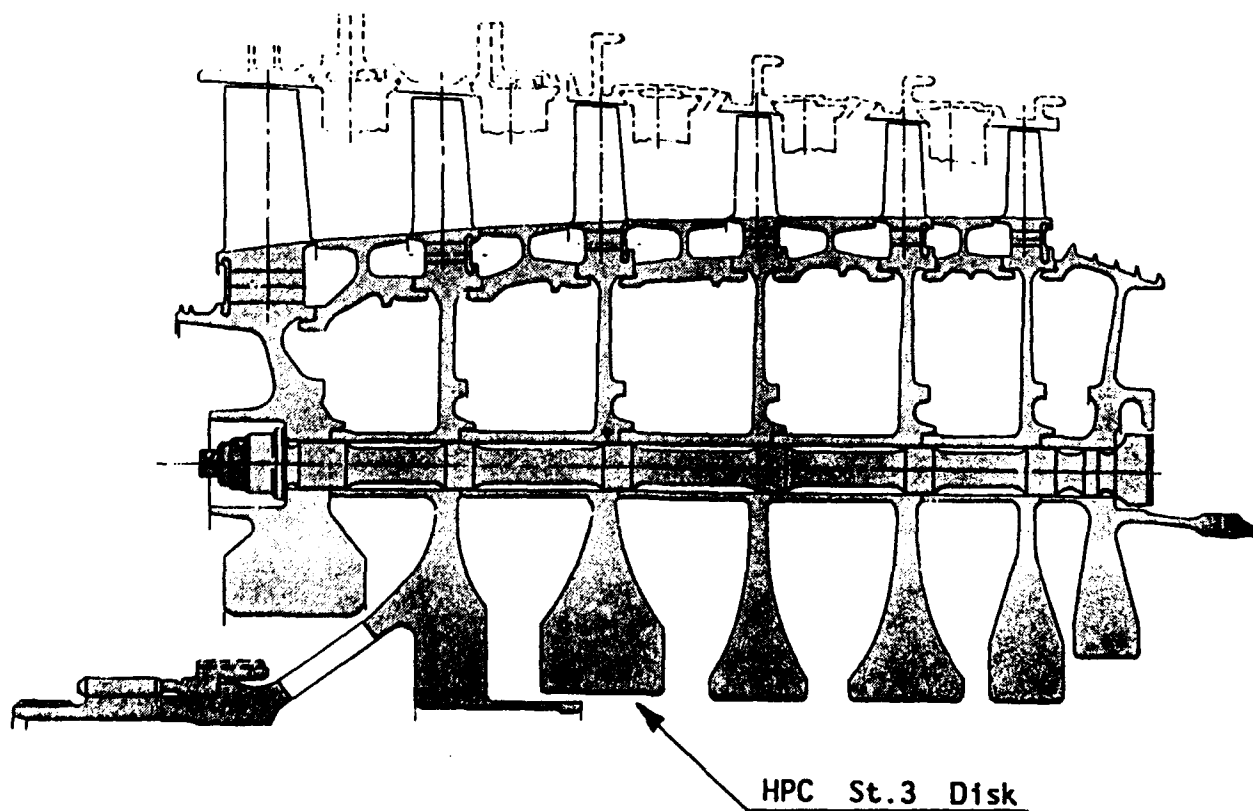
General Arrangement for Bolt Hole Testing
